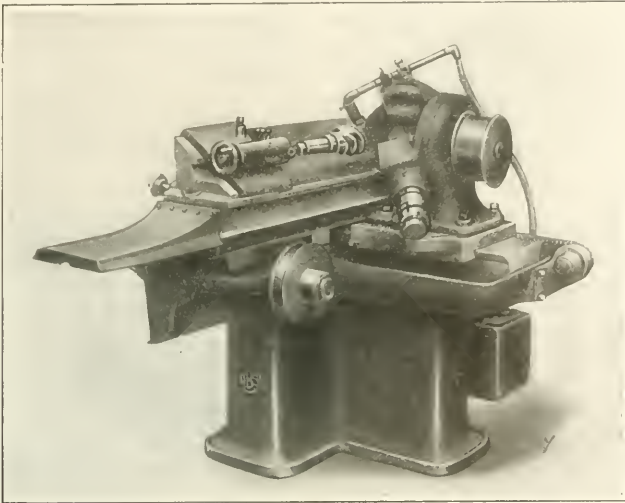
Rear View of Worm Grinder, showing Work, Single Pulley Drive, and Arrangement of Wheel Head
